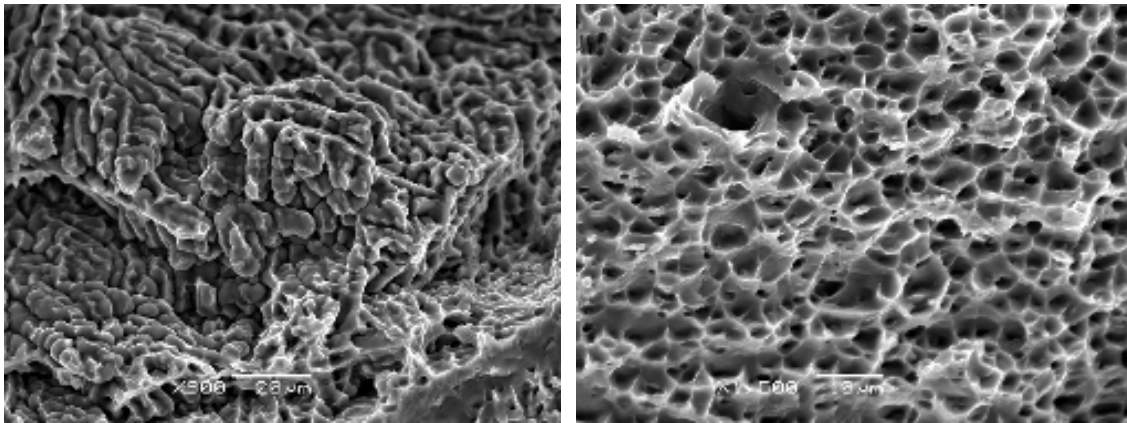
Ductile fracture surface produced during transverse tensile testing of a weld produced with a total welding power of 2.6kW at a speed of 30 mm/s.
